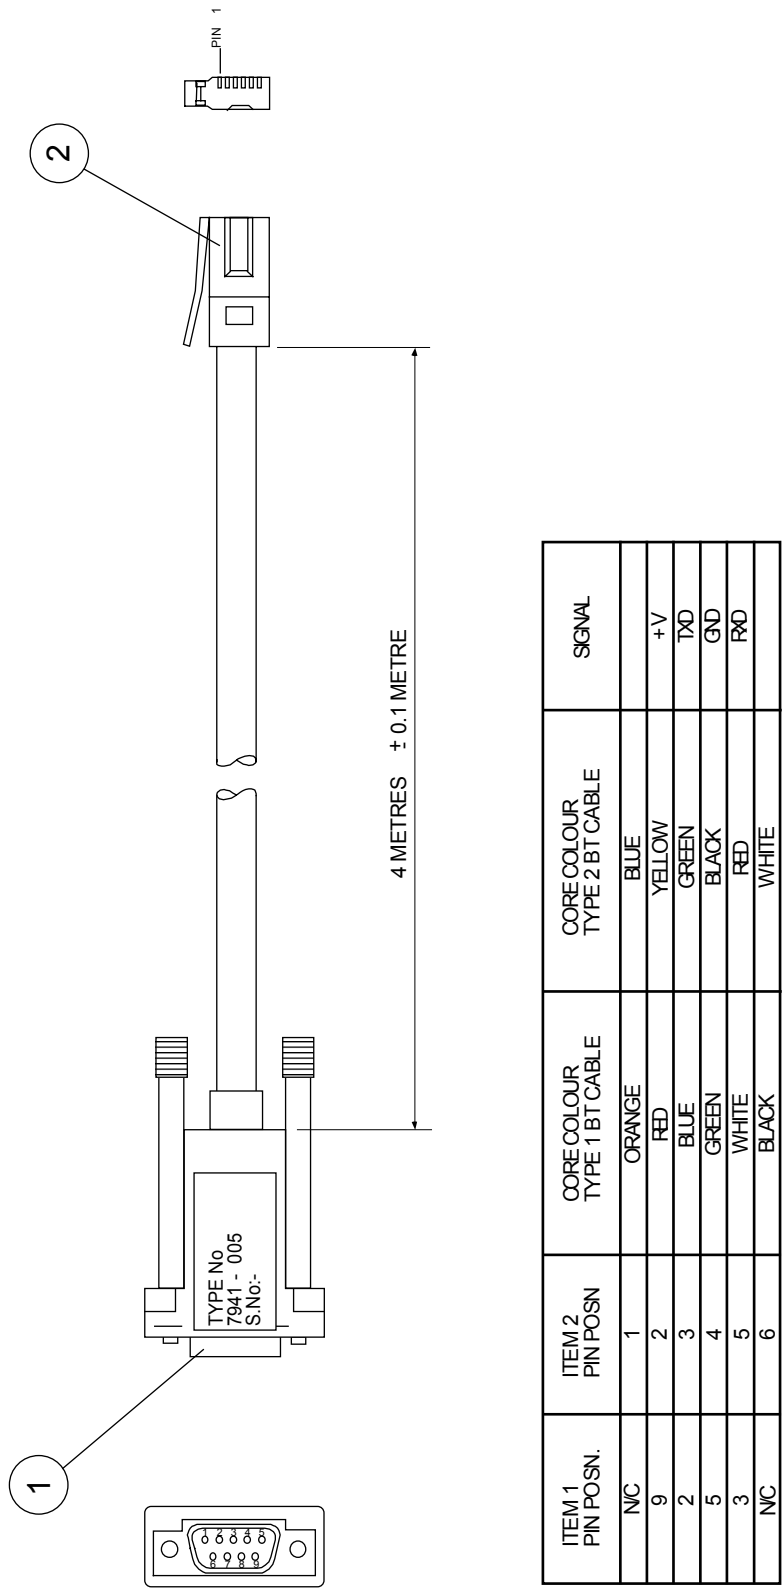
Type 7784-042 Keypad to Keyboard Lead
